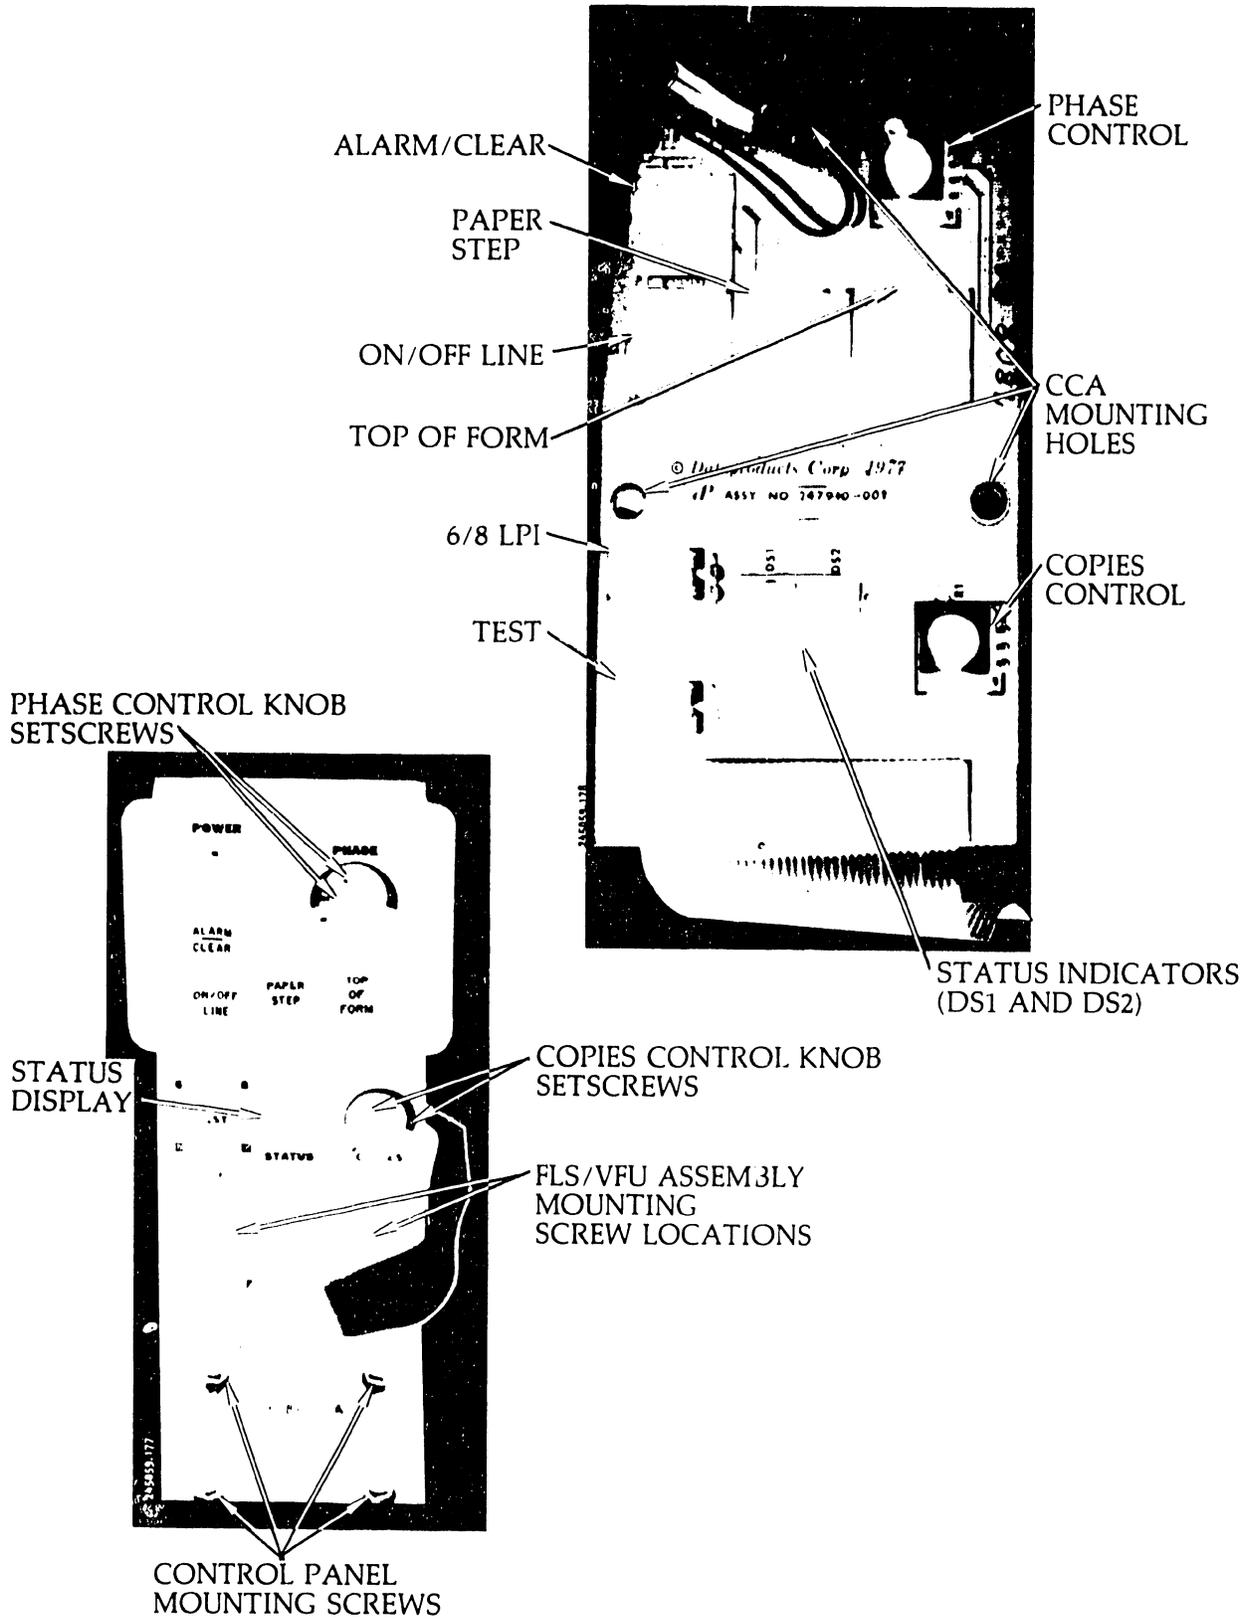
B. Control Panel Circuit Card Assembly Removal/Installation
